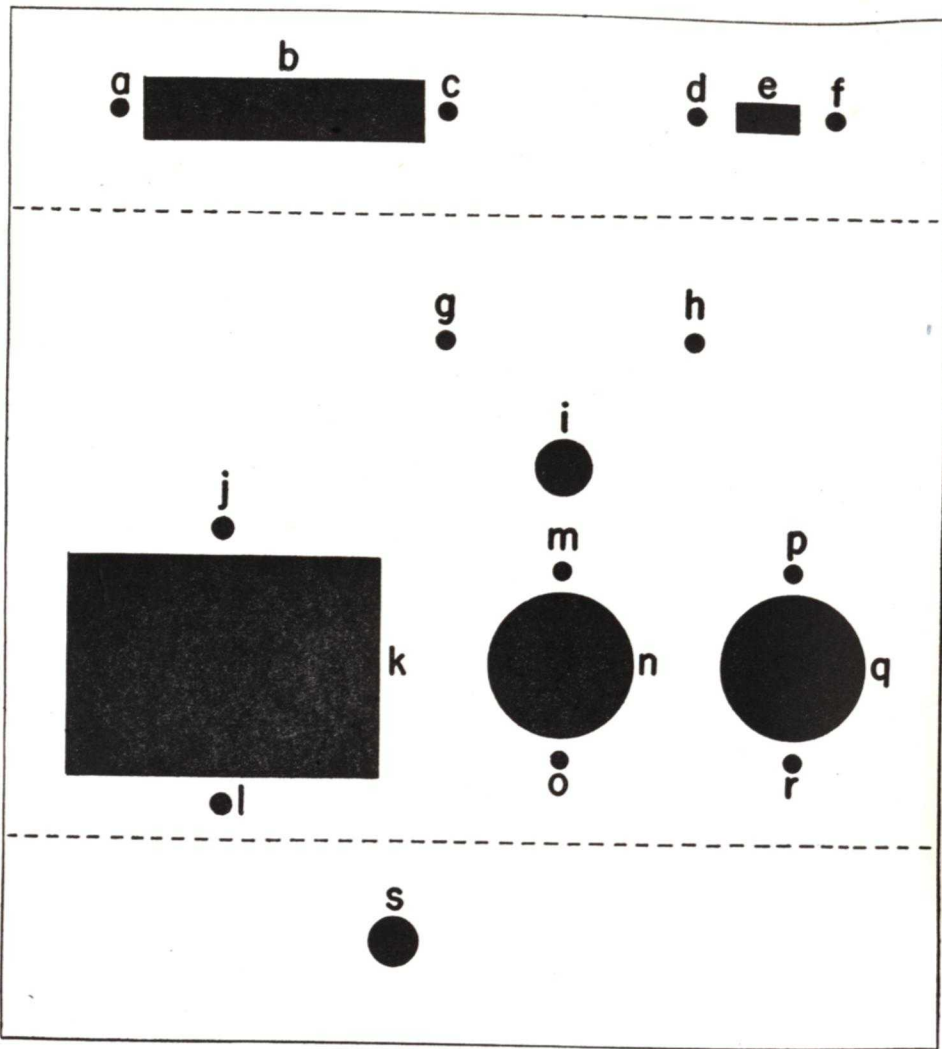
Chassis layout diagram for the a.c. power pack, drawn to show what you would see if you looked at the bottom of the chassis while it was a flat sheet (before bending the sides). The holes are lettered here merely for your convenience in locating on your own chassis the correct mounting holes for the various parts; do not mark the holes in this manner on your chassis, for this diagram is entirely sufficient for assembly purposes.
